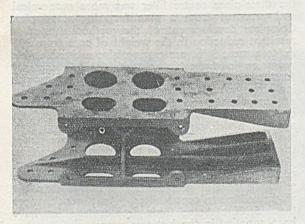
Three-piece Centre Filler Casting as now Produced for Railway Freight Car Manufacture.
